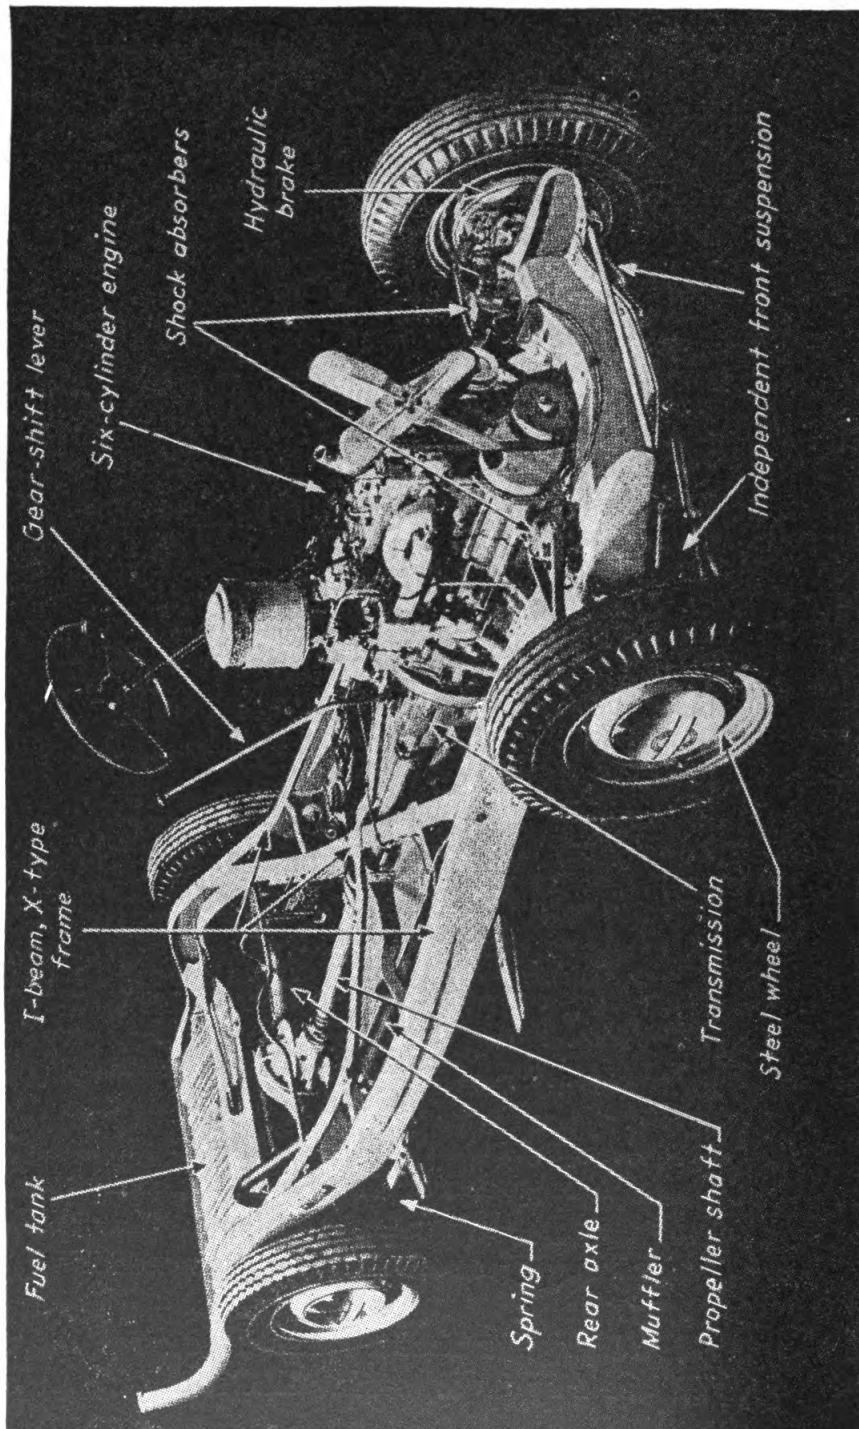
Modern gasoline engine-driven passenger car chassis showing its various parts.
